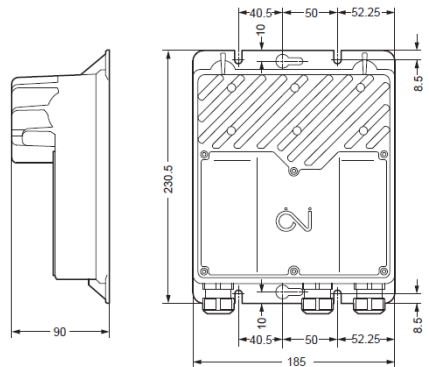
Dimensions of the OJ-DRHX-1690 regulator
